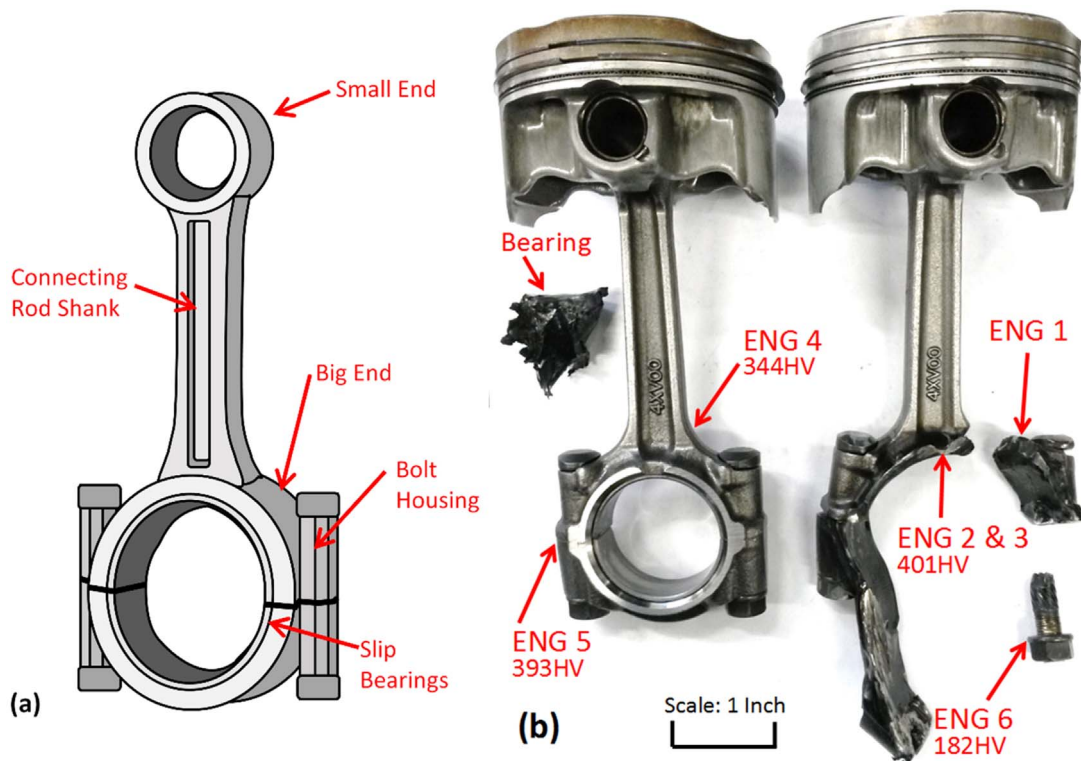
(a) Diagram of an assembled connecting rod, rod cap, bolts and slip bearing with key features and components annotated in red; (b) The intact and failed connecting rod and piston assemblies, left and right consecutively, are shown with the failure.
